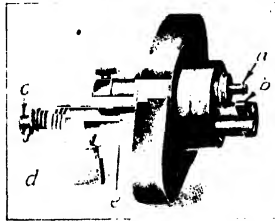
Hammer-Break Igniter Plug Removed from Cylinder Head
